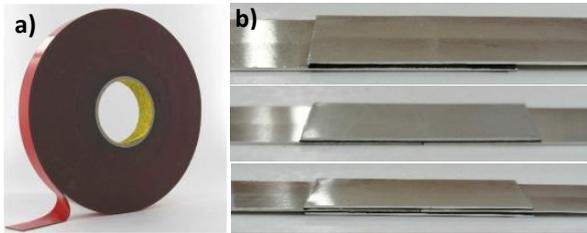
a) Double-sided tape b) Test specimens of adhesively bonded different joints
